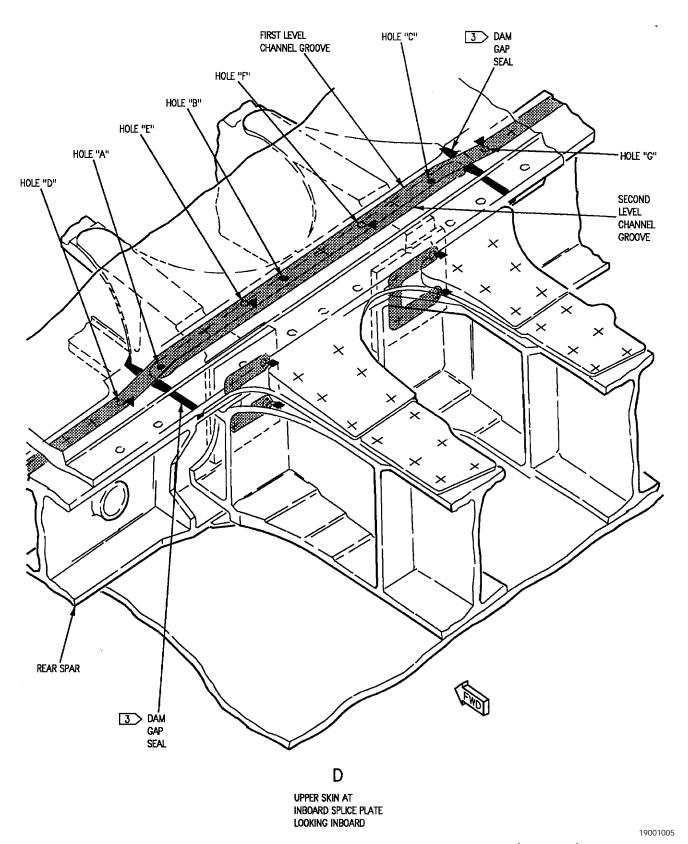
Upper Skin Channel Groove Seal Injection (Sheet 5)
